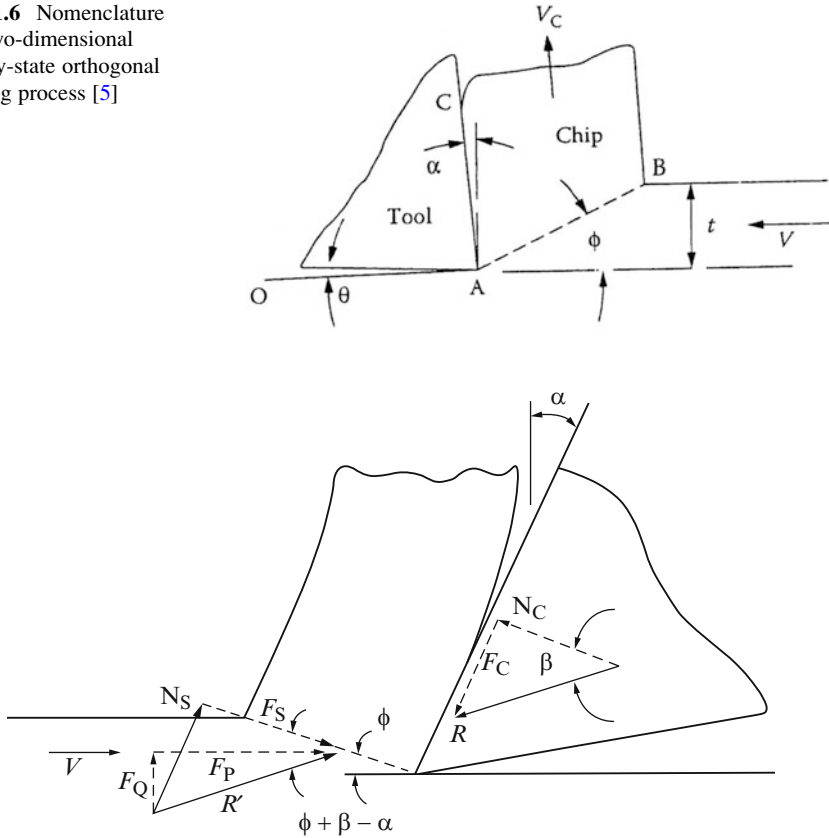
Cutting forces at the tool tip for the cutting operation shown in Fig. 1.6 [5]
